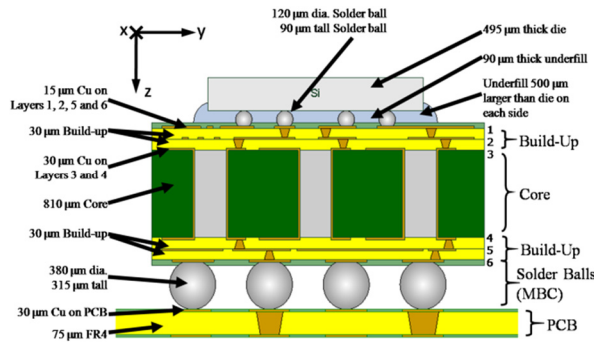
General cross-sectional view of the sample six-layer IC package with the underlying sample PCB.
